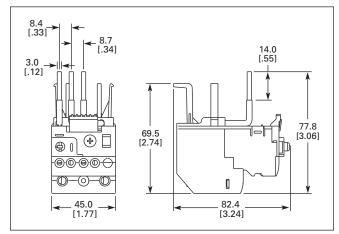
45 mm C396 (6.4 – 32A) Direct Connect to *XT* Frame B Contactor — Approximate Dimensions in mm [in]
